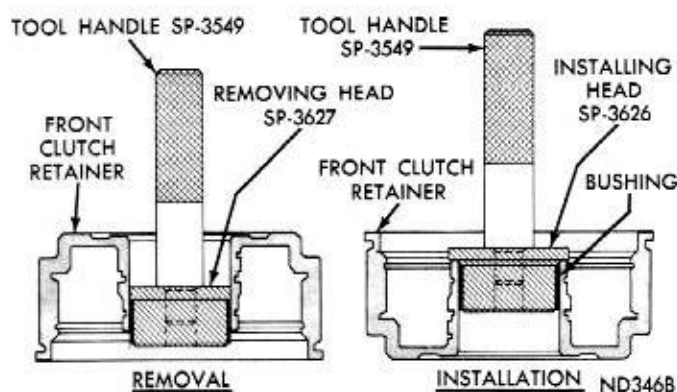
Replacing Front Clutch Retainer Bushing (A-904)
